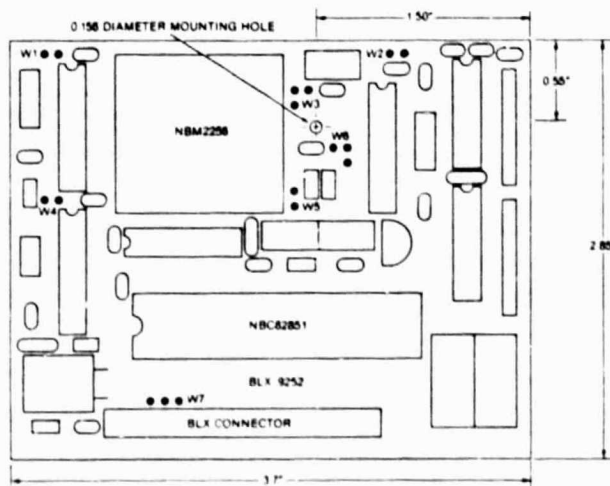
BLX-9252 Physical Dimensions and Component Placement
